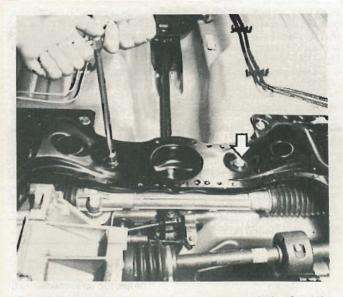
Unscrewing the steering gear securing bolts (Sec 23)
